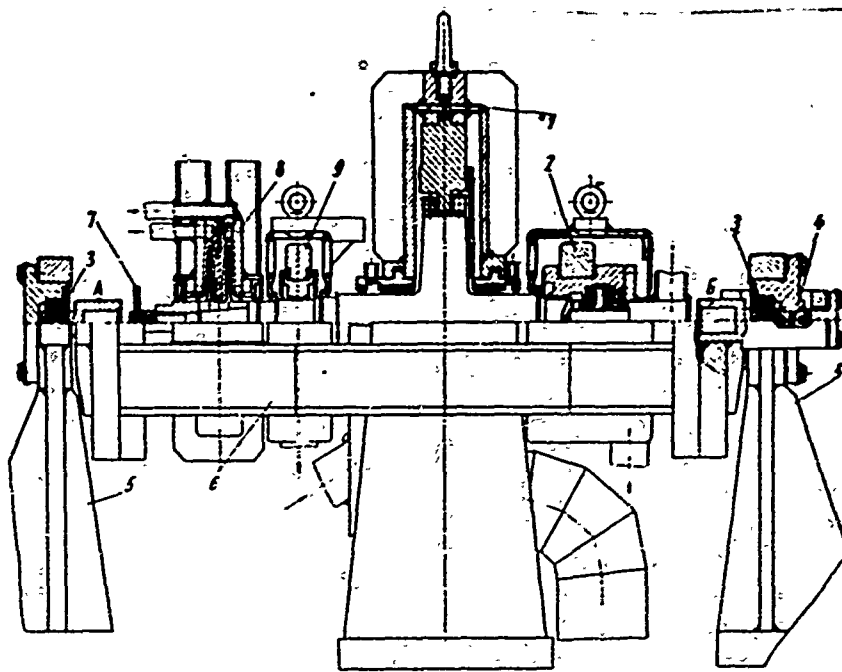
Experimental high-speed turbine with frame suspension, Kaluga Turbine Plant: 1 - stationary turbine housing; 2 - radial-thrust bearing; 3 - bearings of frame suspension; 4 - axial retainer; 5 - stationary struts; 6 - frame; 7 - magneto of tachometer and protection system; 8 - water brake casing; 9 - radial bearing.
